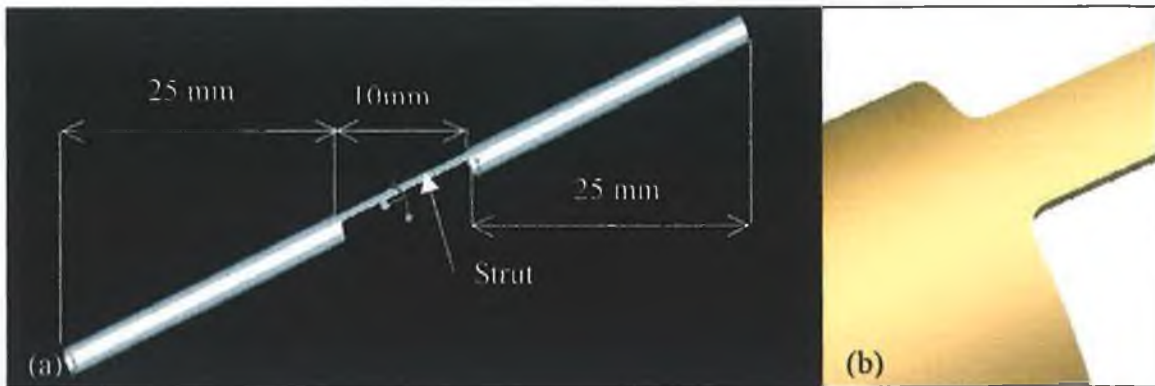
(a) 3D drawing of the specimen, (b) detail of the fillets.
